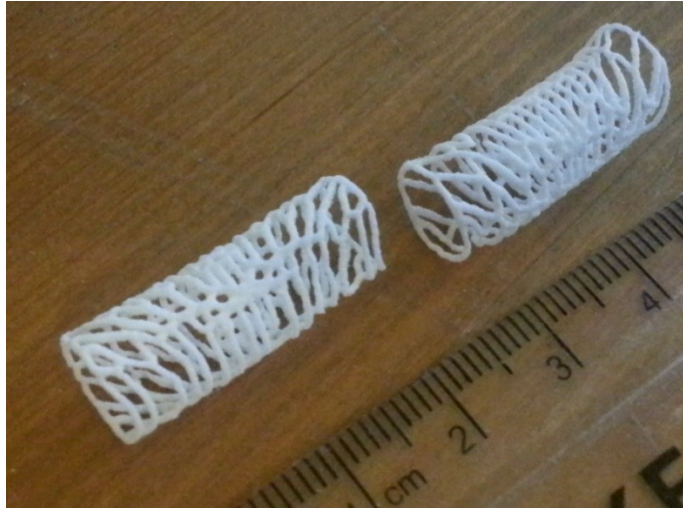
Manufacturing defects: Struts at stent ends distorted due to being too thin.
